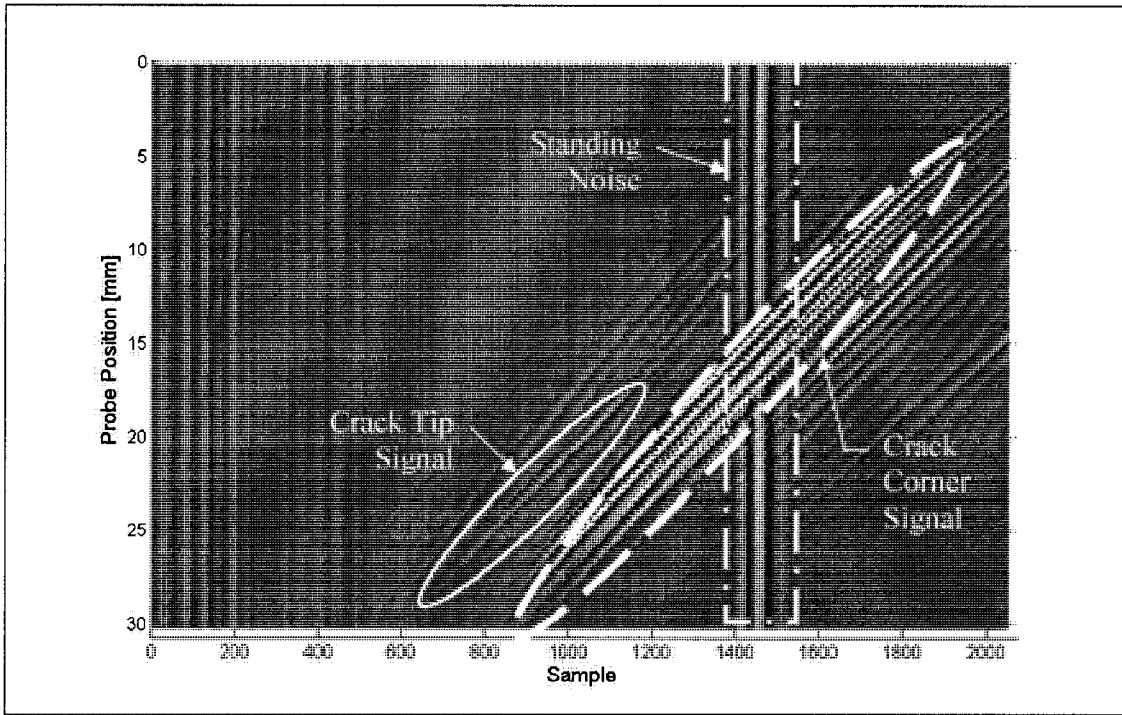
B-scans of specimen CO1 at 100% crack opening load
